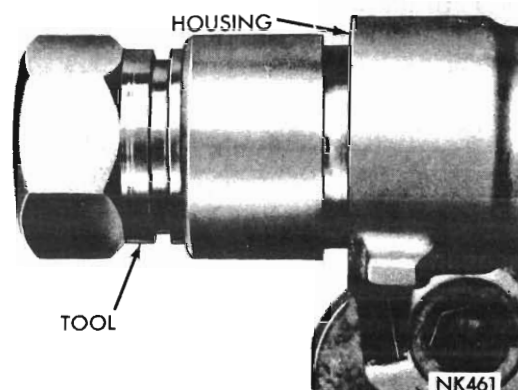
Installing sector shaft oil seal (Tool E19C20A)
